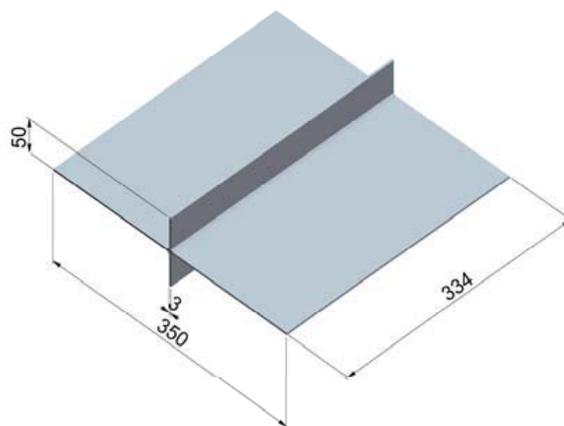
Ti6Al4V welded plate, dimensions of plates and flanges.
